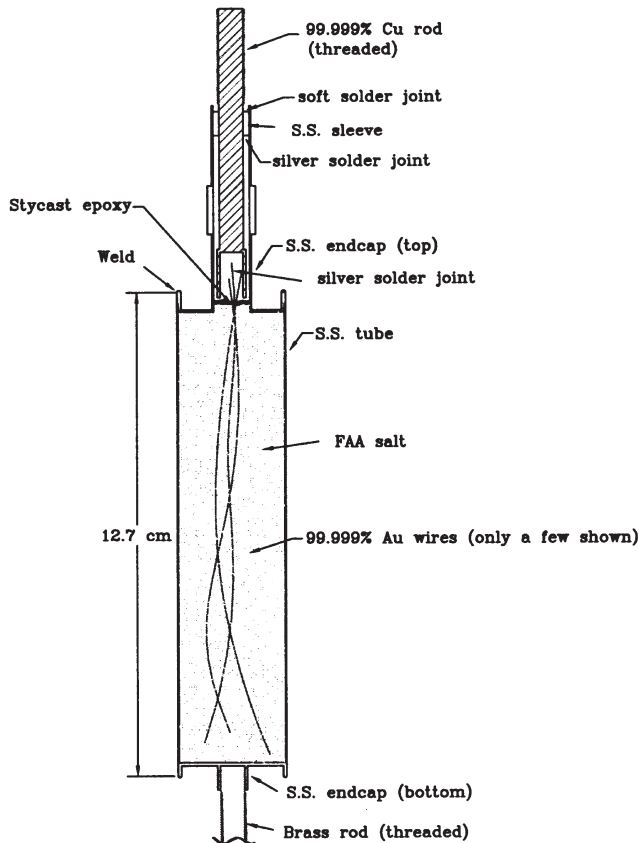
Salt pill housing for our ADRs. The FAA is contained by a thin-walled stainless steel can which is welded at the two ends. Heat is extracted from the sample by a Cu braid (not shown), drawn down the Cu rod through the Au wires and into the cool salt. An epoxy barrier protects the Cu rod from the corrosive FAA.
